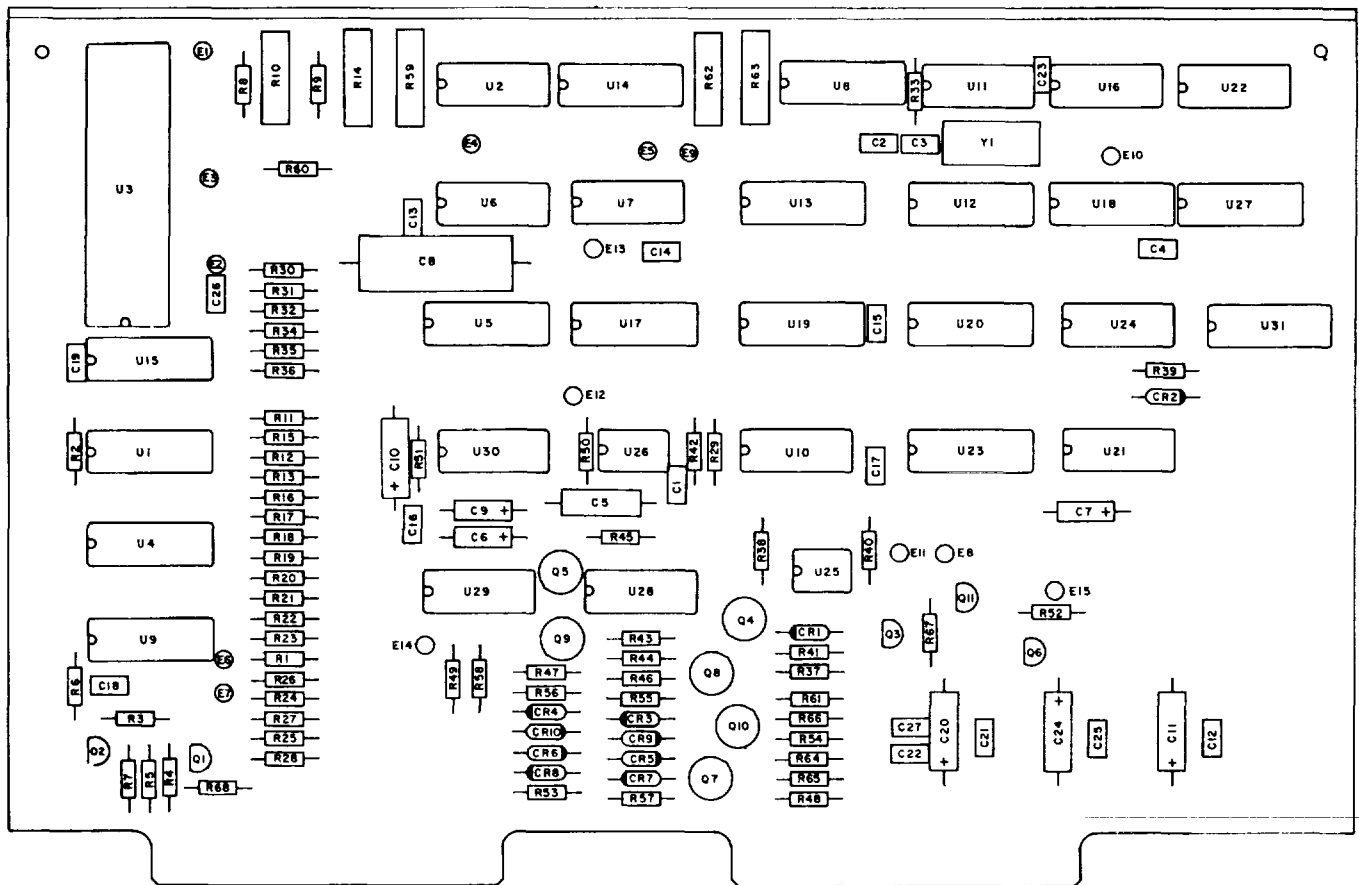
Operations Site (Remote) Modem Circuit Card Assembly, 4A3, Parts Location Diagram
